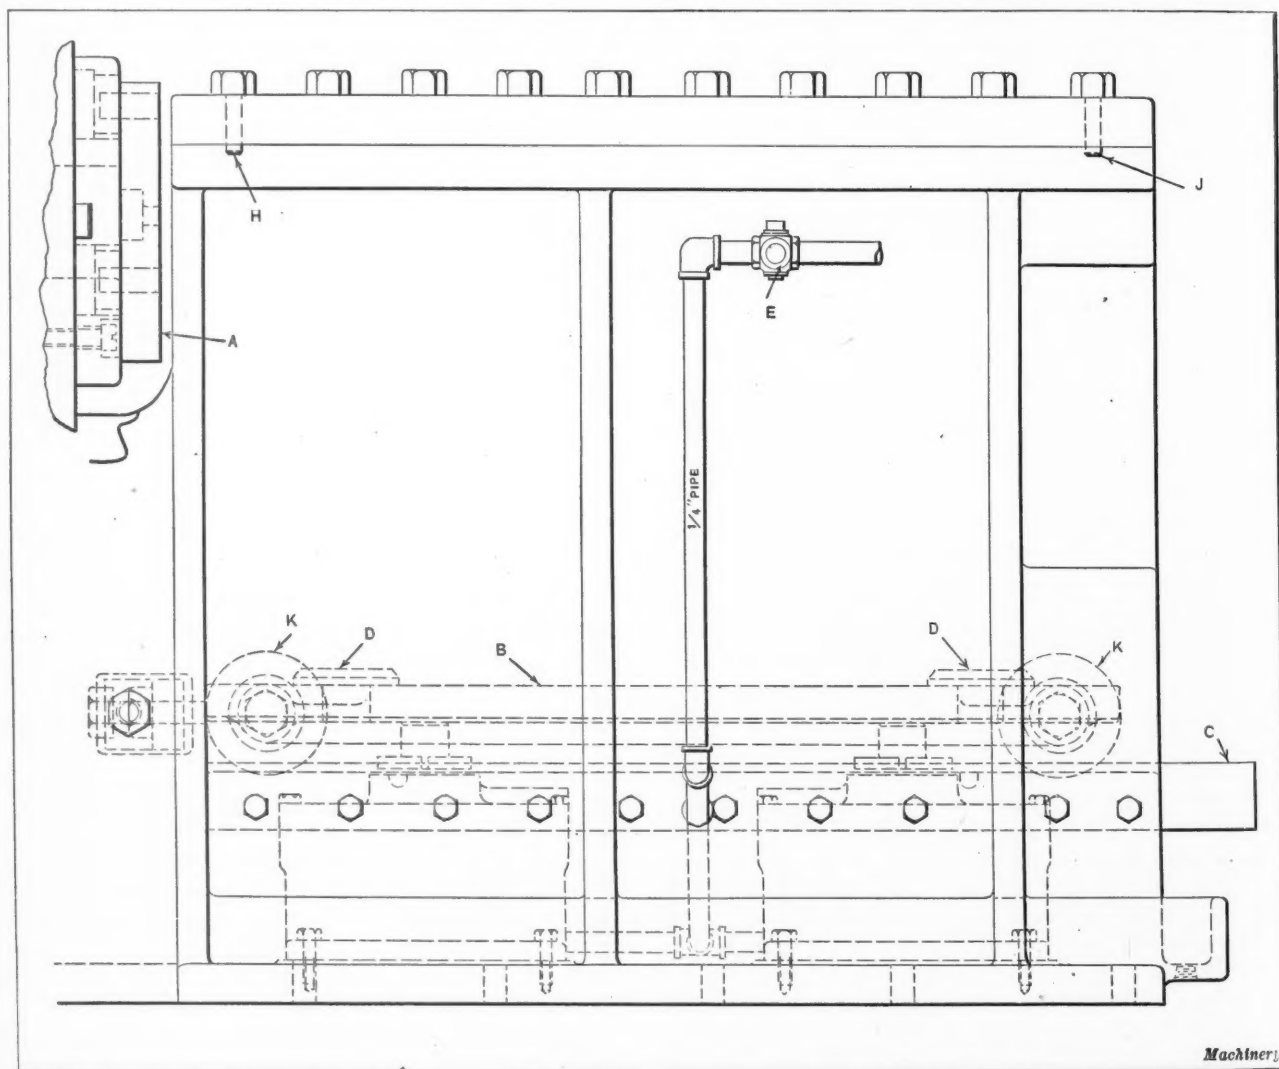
Cylinder Block Holding Fixture of Crankshaft Bearing Burnishing Machine
